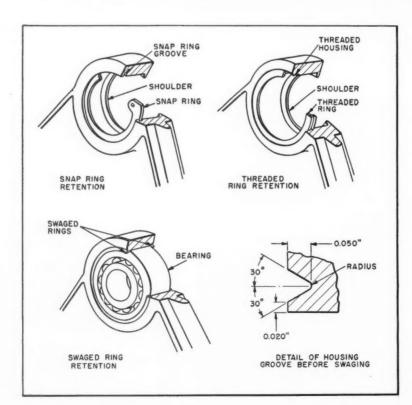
Three methods of retaining bearings in their housings. In the swaging method, a ring of housing material is swaged over the bearing chamfer.
